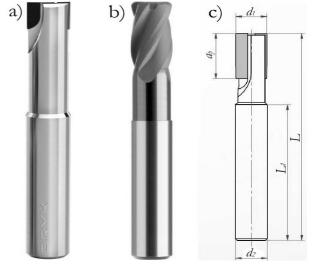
Tools used in the study: a) 3-tooth end mill with PCD inserts, b) 4-tooth PCD-coated carbide end mill, c) schematic showing basic dimensions of the end mills
